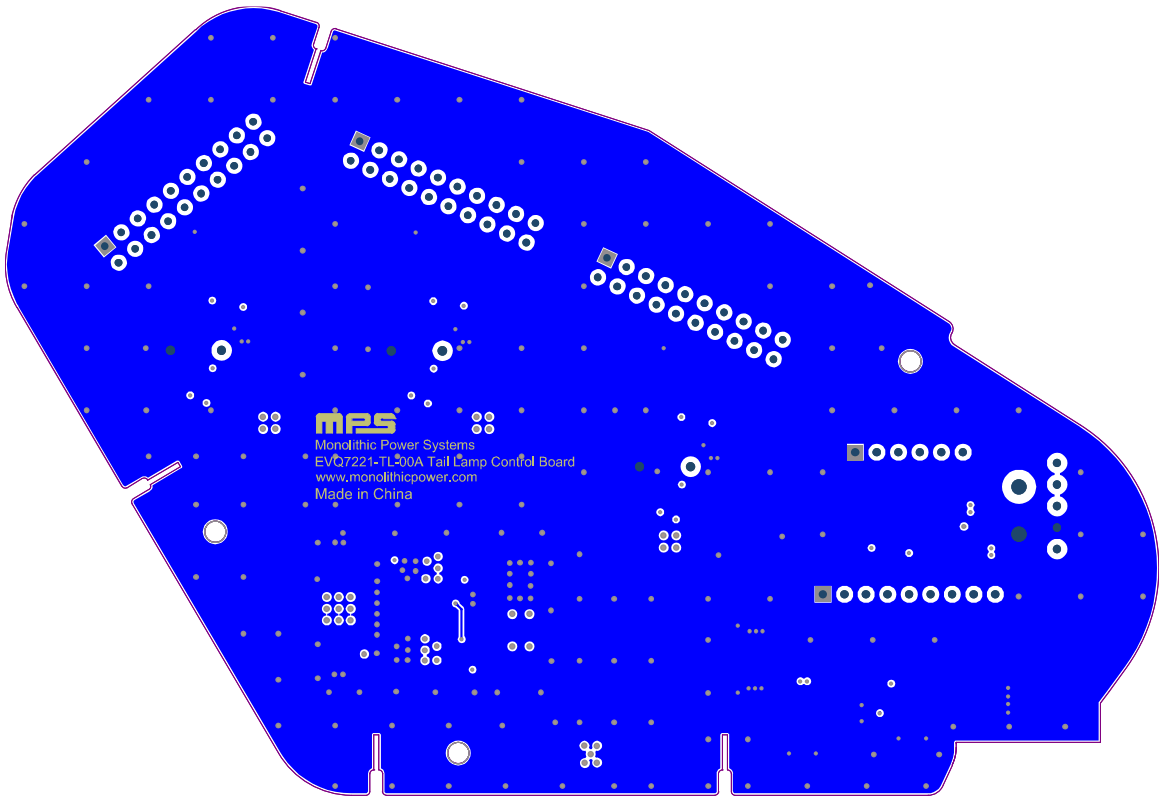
Bottom Silk and Bottom Layer of the EVQ7221-TL-00A Tail Lamp Control Board
